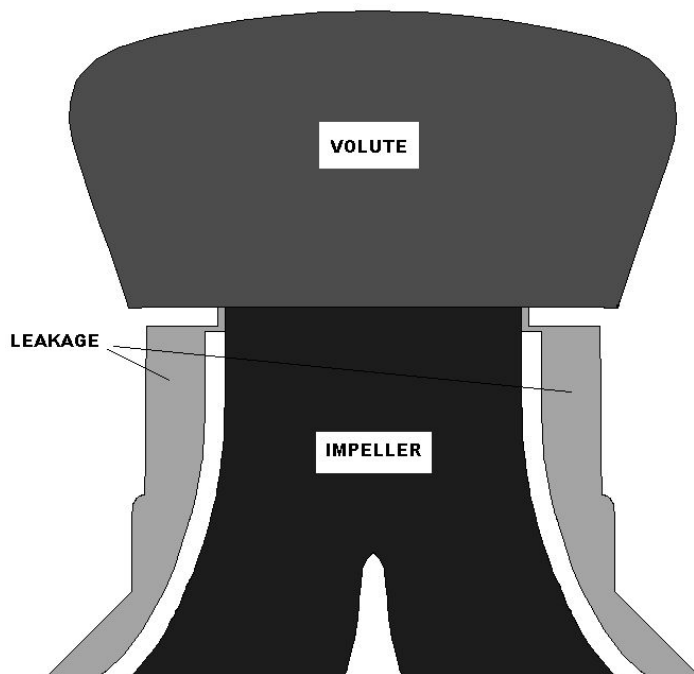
Impeller, volute, leakage arrangement at impeller outlet
